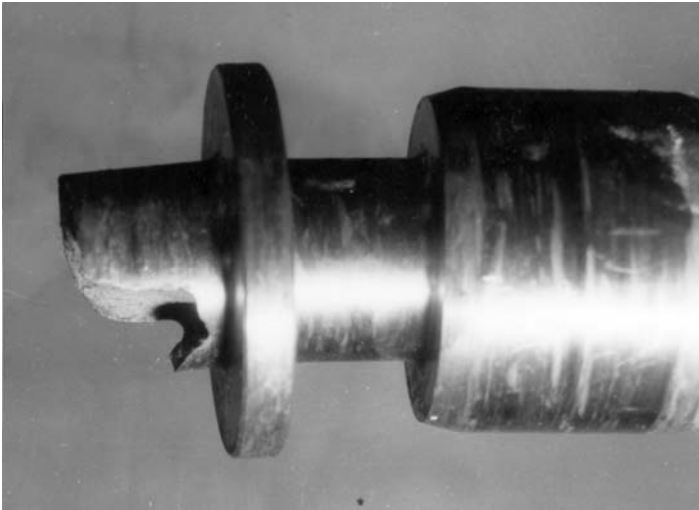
Location of fracture. Note the slight bending on the shaft close to the region of fracture.
